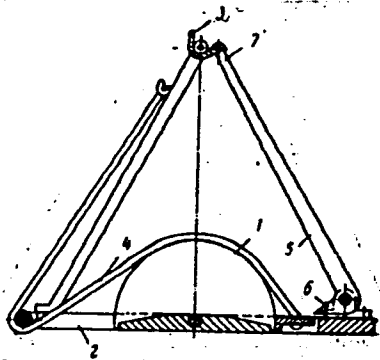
1- soil-collecting container; 2- frame; 3- carrying cable; 4- elastic pull; 5- lever; 6 and 7- lever arms
